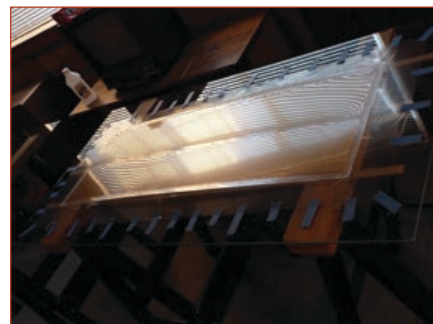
Stretch the assembly out after the heat-shrinking process is performed.
